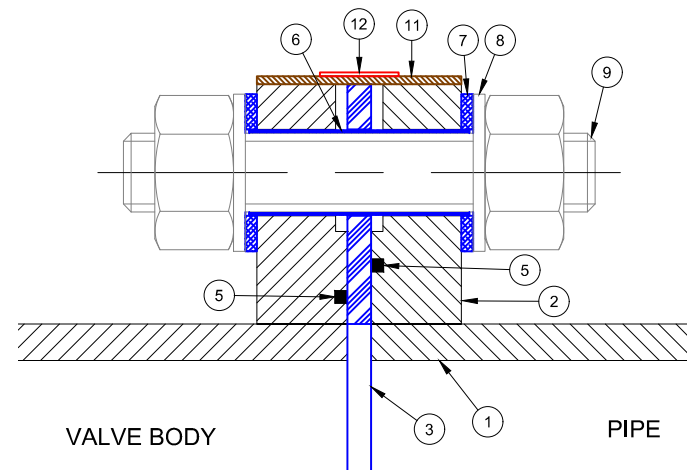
INSULATED FLANGE & INSULATED SUPPORT BRACKET
